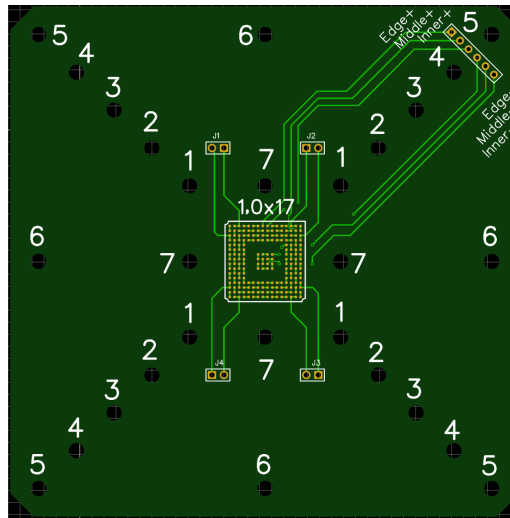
Top view of the PCB without BGA attached. The design of the PCB was made such that three circuits were created for resistance monitoring.
